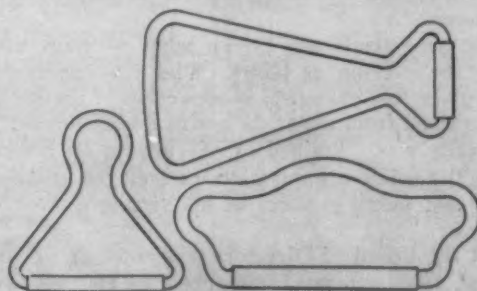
Examples of the Products of the Machine Shown in Fig. 1.
